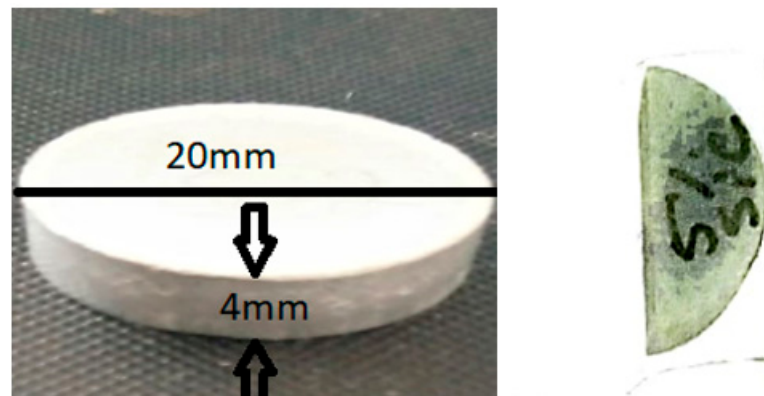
The left side of the figure shows fabricated AMMC while the right side shows a machined sample.
